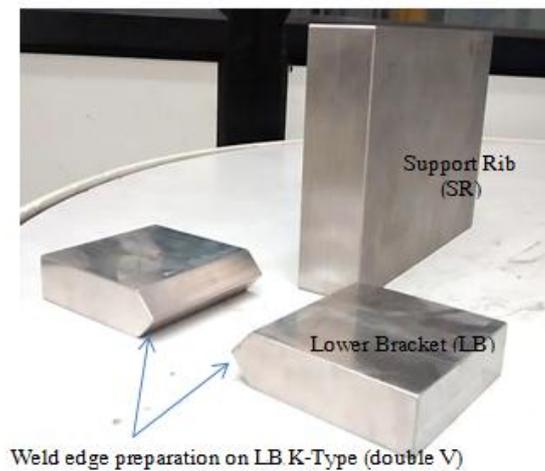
K type weld edge preparation on Lower bracket
